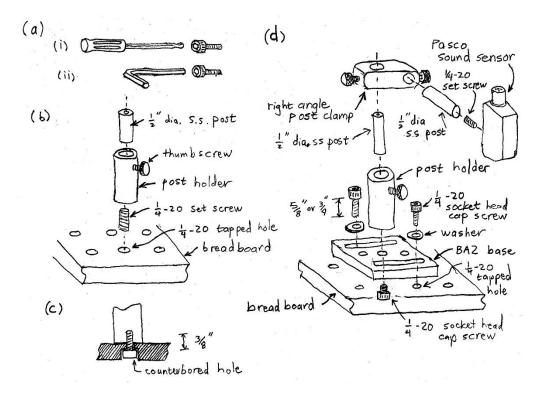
(a) (i) Ball driver and socket head cap screw. (ii) Hex key wrench (also called an Allen wrench) and socket head cap screw. (b) Possible arrangement to mount post for rubber band. (c) Cross-sectional view of a component held in place with a socket head cap screw in a counterbored hole. (d) Possible arrangement for mounting the Pasco sound sensor in this experiment. In this arrangement, the post holder is secured to a countersunk hole in the BA2 base as illustrated in Fig. (c).
